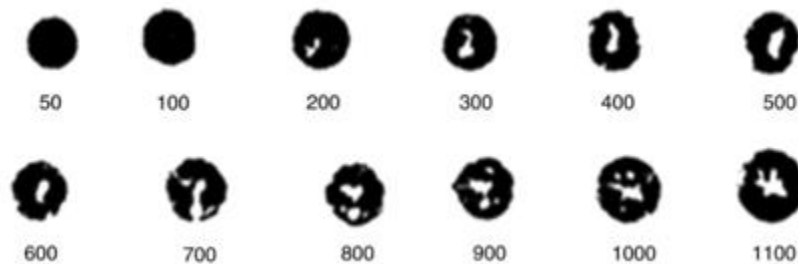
Electrode face of carbon imprint method at different weld numbers [48]
